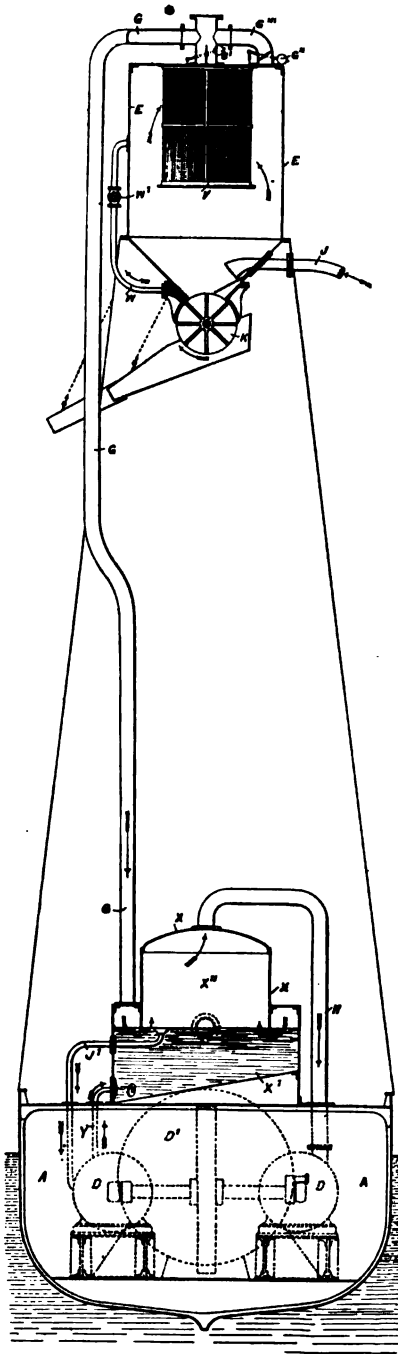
Machinery Barge Built on Haviland & Farmer's System.
